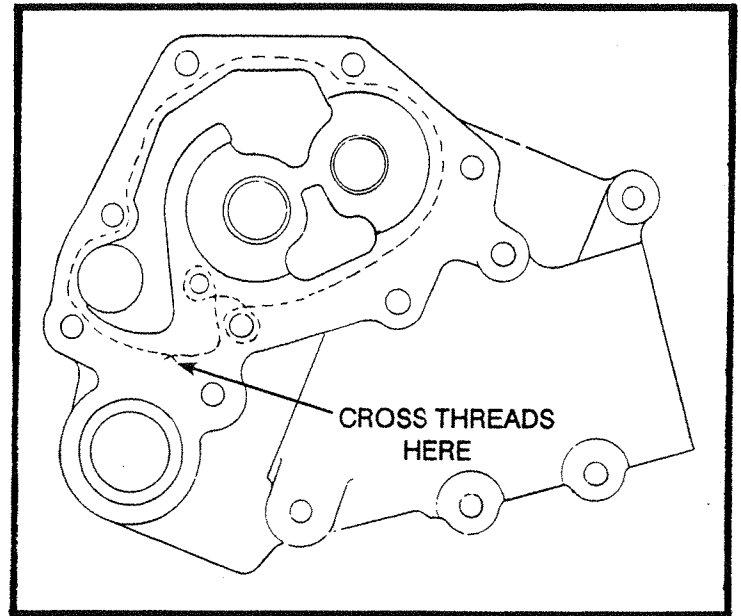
OIL PUMP COVER THREADING PROCEDURE
